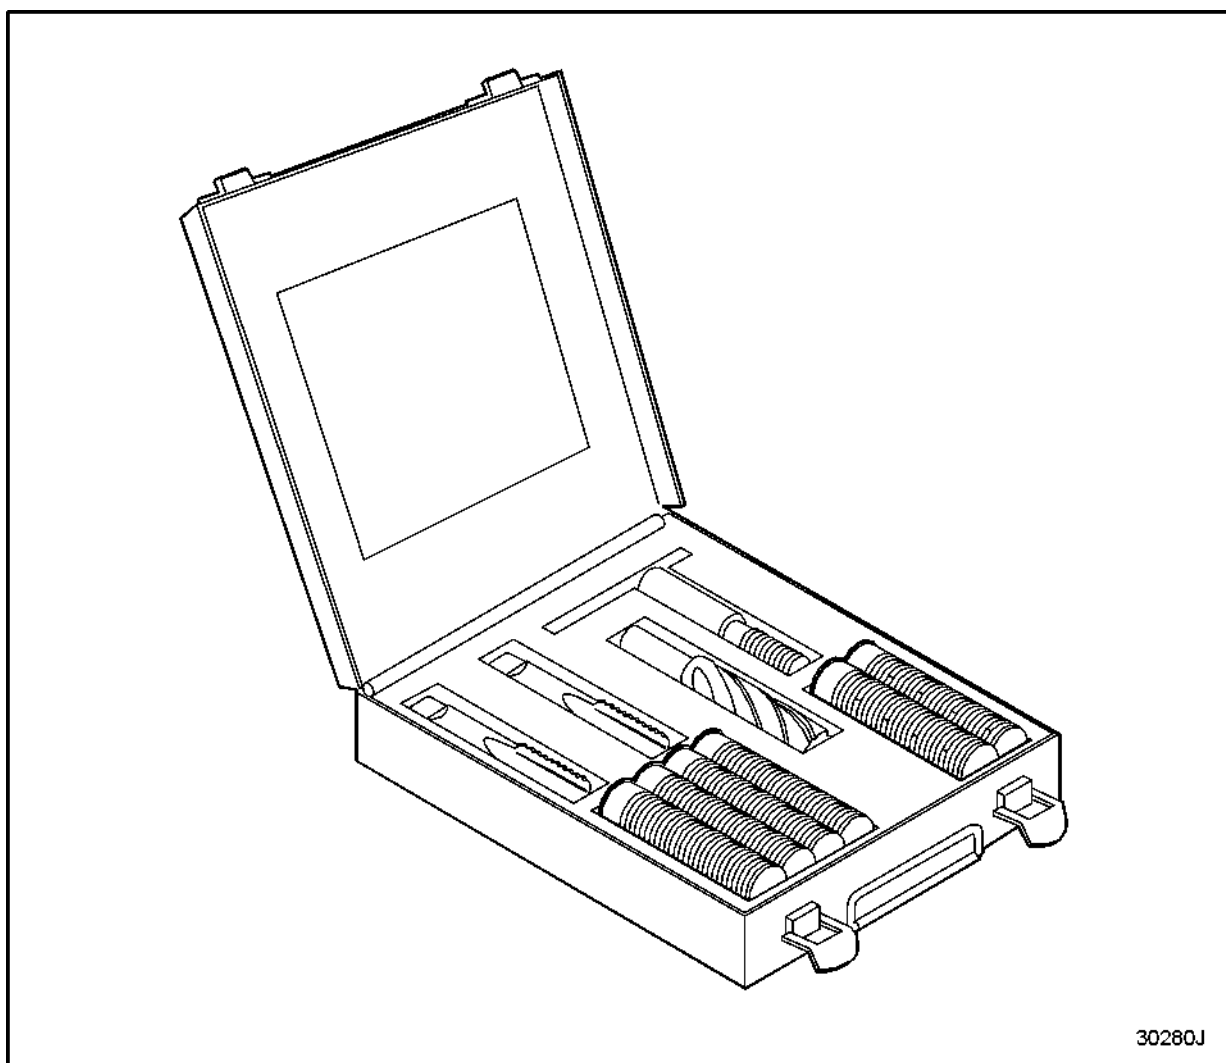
Thread Repair -Main BRG/HD Bolt Hole,J 29513
